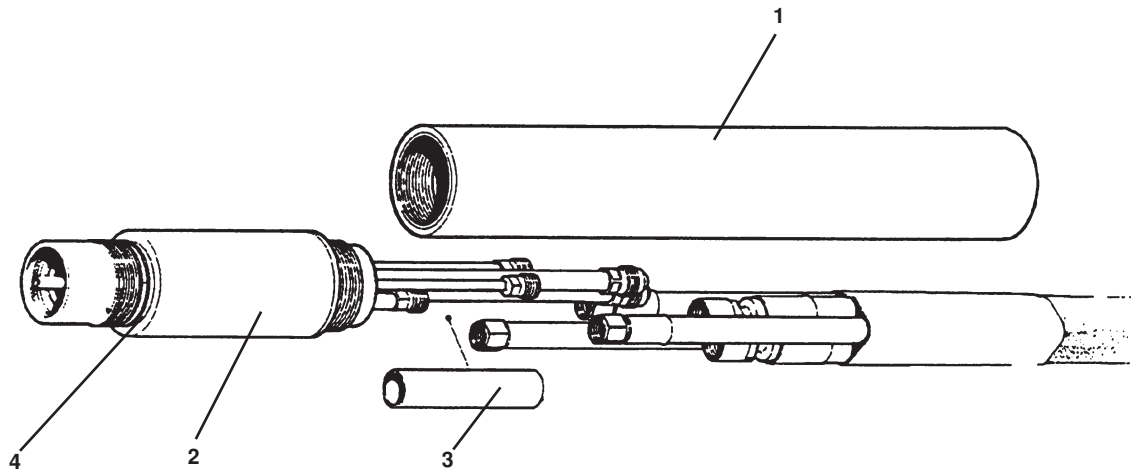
MAX200 Machine Torch Assembly (Optional)
